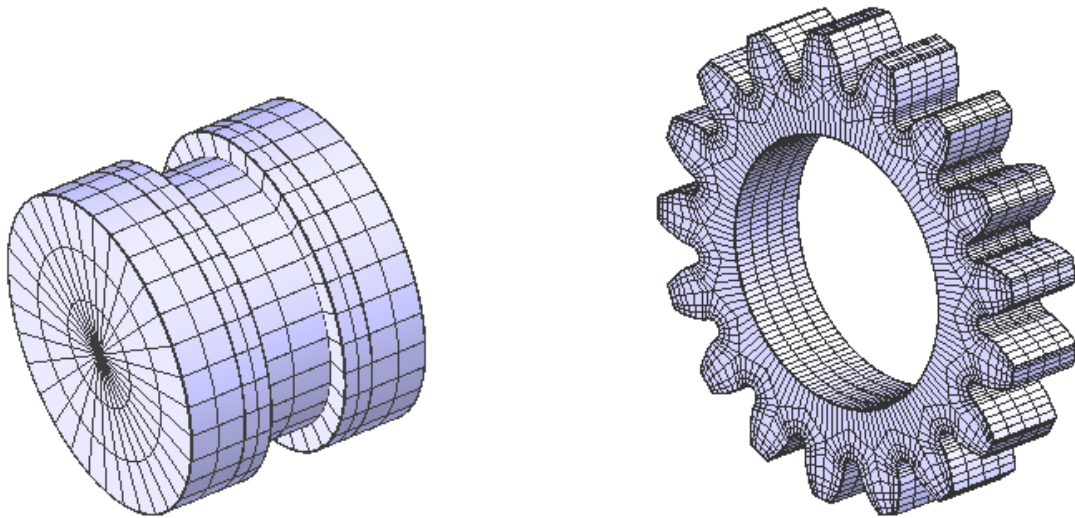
Picture showing the meshed parts which define the driving wheel, i.e. the shaft and the ring structure.
